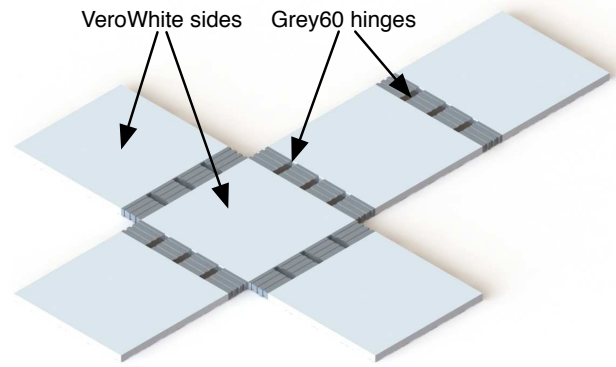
Rendering of the flat configuration of the folding package used for 3D printing.
